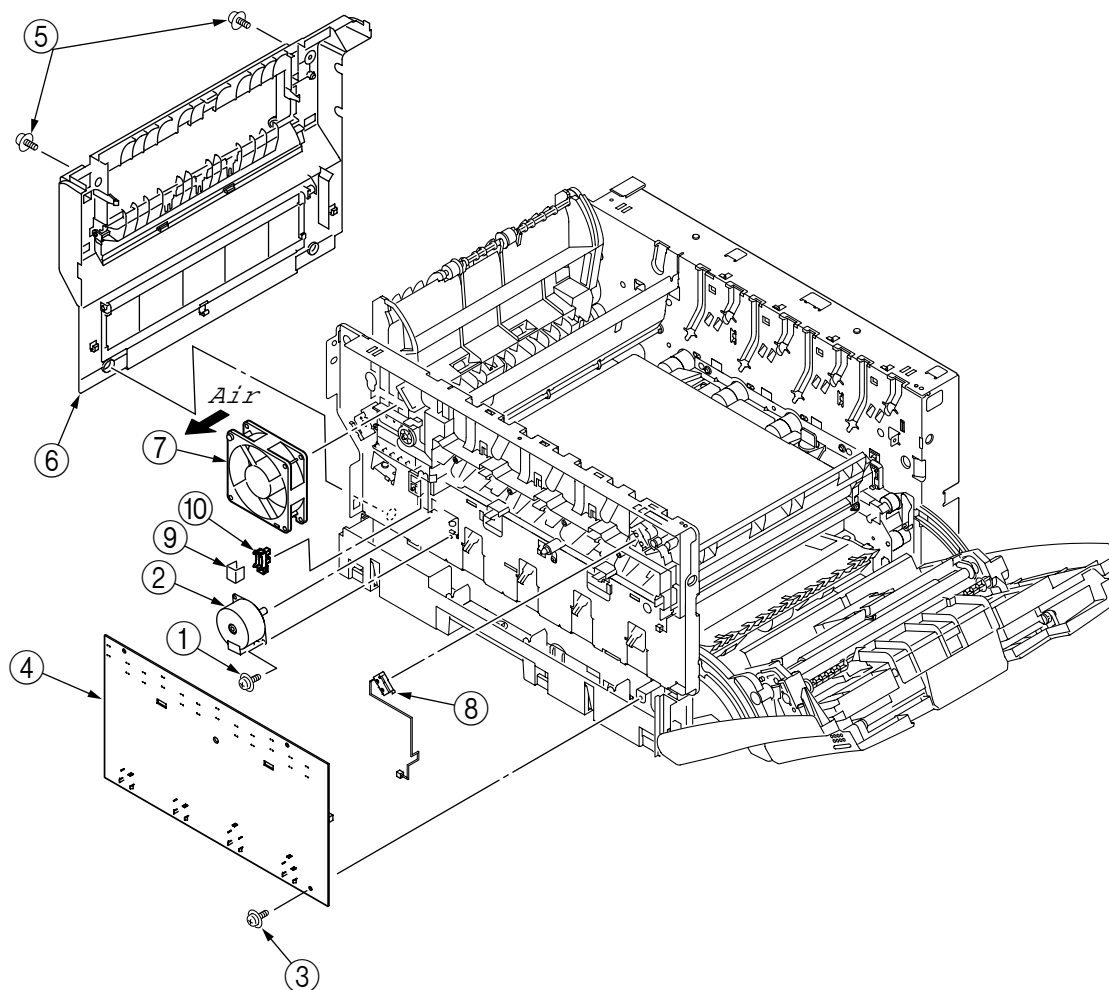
FAN (Fuser) / Belt Motor / High Voltage Power Supply Board / Cover Open Switch / Image Drum Up/Down Sensor
